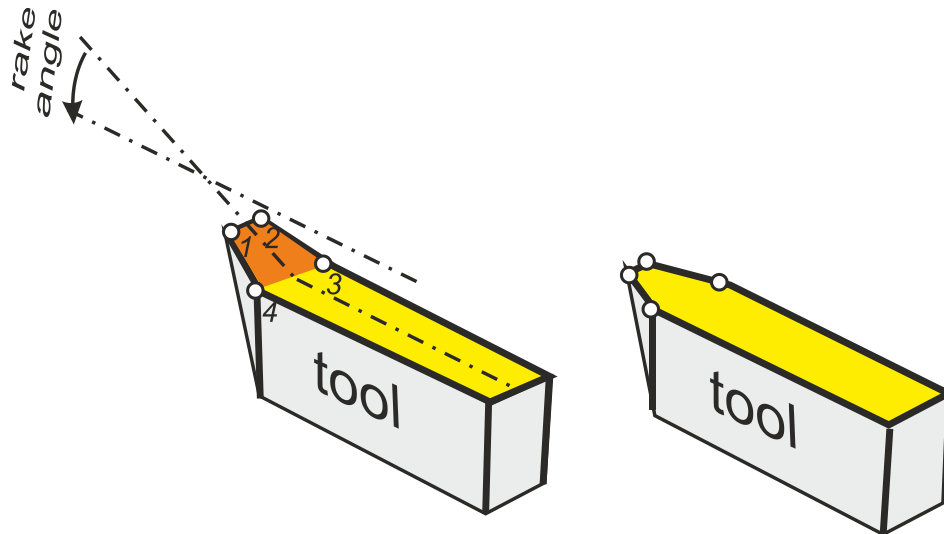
Shema of the turning-tool used for screw -making by using cutter non-zero (left) and zero rake angle (right).
